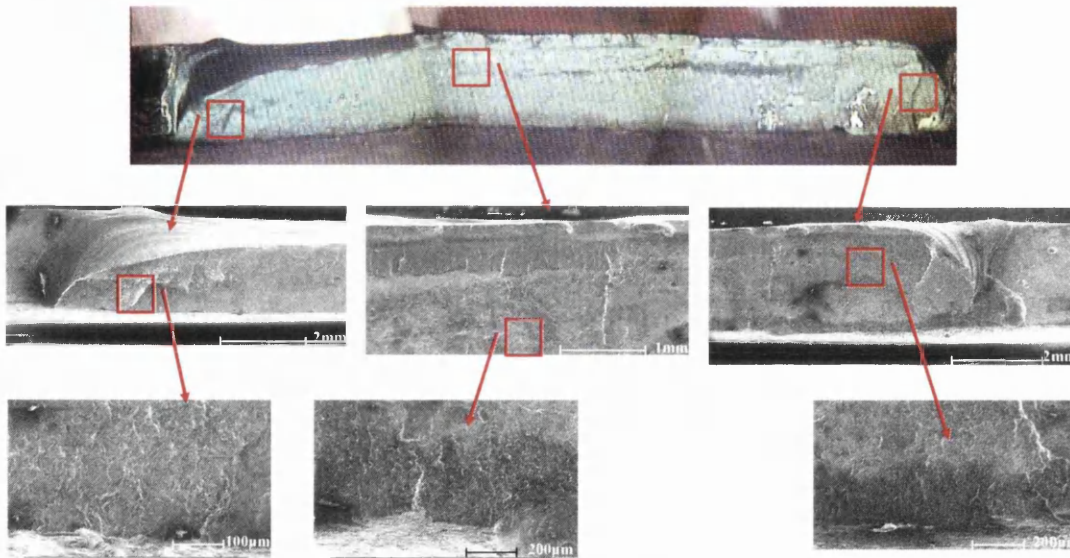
Typical Weld Throat Failure – Sheet View, GM3
